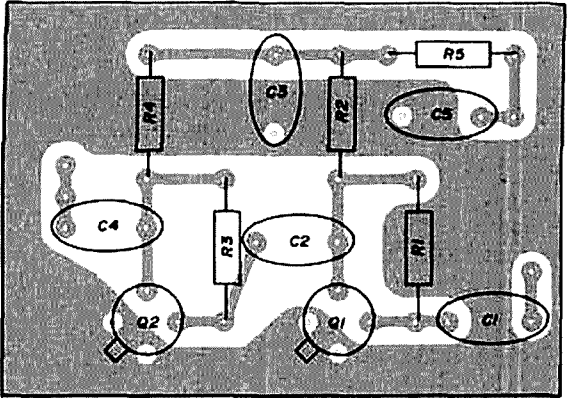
Printed-circuit component layout for the wideband rf amplifier. Full-size printed-circuit layout is provided in fig. 3.
